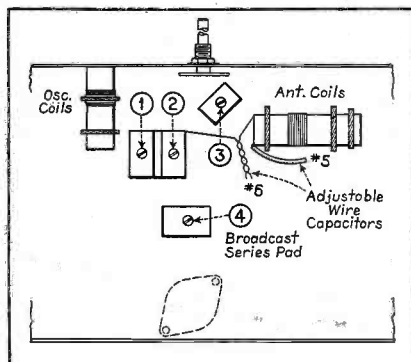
Bottom view of chassis, Belmont 583. Adjustment numbers referred to in text will be found on this drawing.
